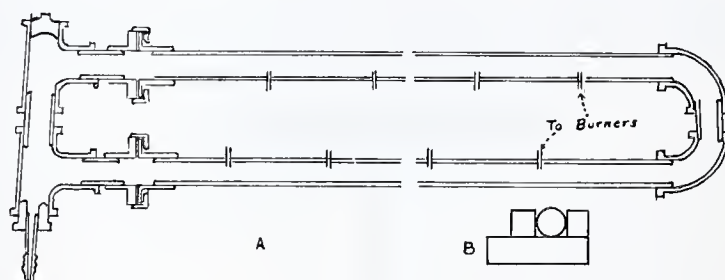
CONSTRUCTION OF BURNER ASSEMBLY
